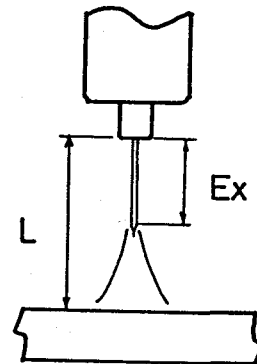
Definitions of wire extension, E_x and distance from contact tip to base plate welded, L .
